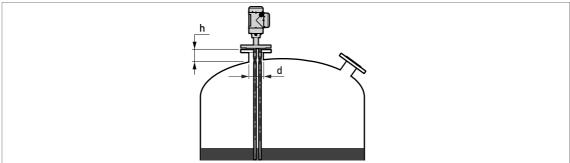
Recommended nozzle dimensions for double rod and double cable probes
